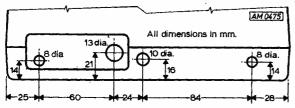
Rear view of the Vero plastic box base, giving details of the drilling dimensions.
